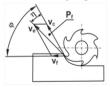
Counter milling. vc – cutting speed, vf – feed rate, φ – contact angle between the wood fiber and the tool.
